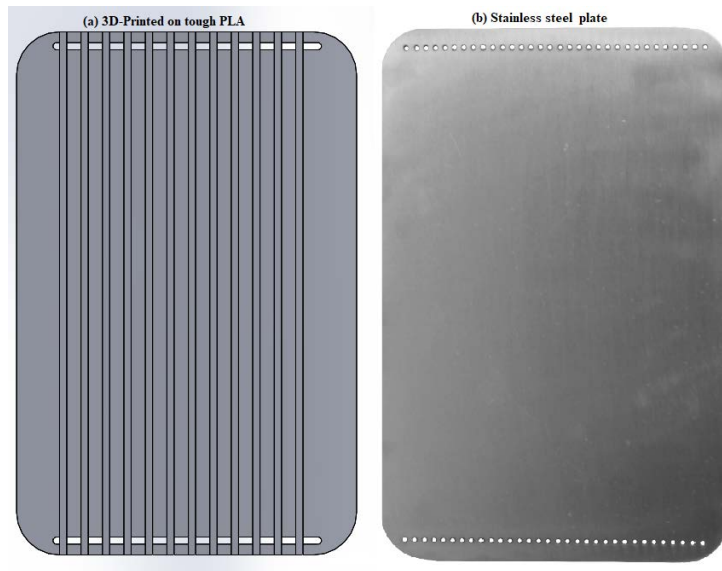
Membrane support plates (a) 3D printed support plate on tough PLA material (b) Sterlitech 316SS support plate
